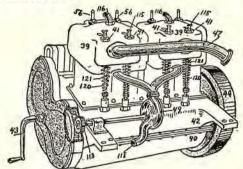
Exhaust valves, manifold, fly wheel, pump, etc.
